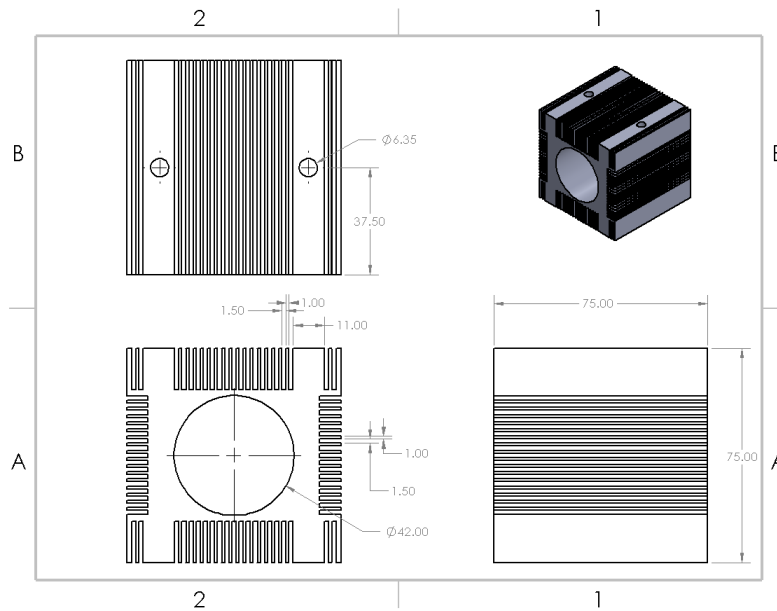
Heat sink designed to reduce heat produced by pump.
